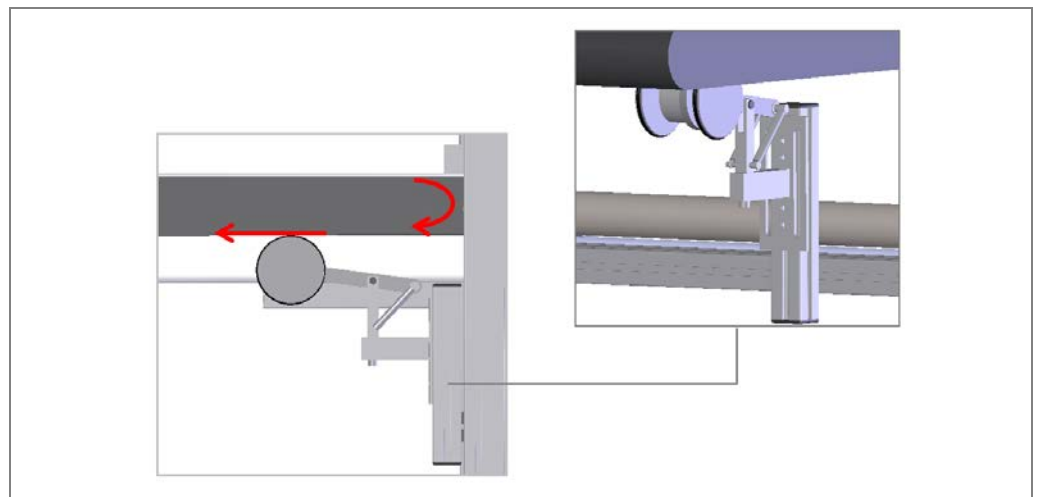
Attaching the measuring wheel encoder to the conveyor belt
